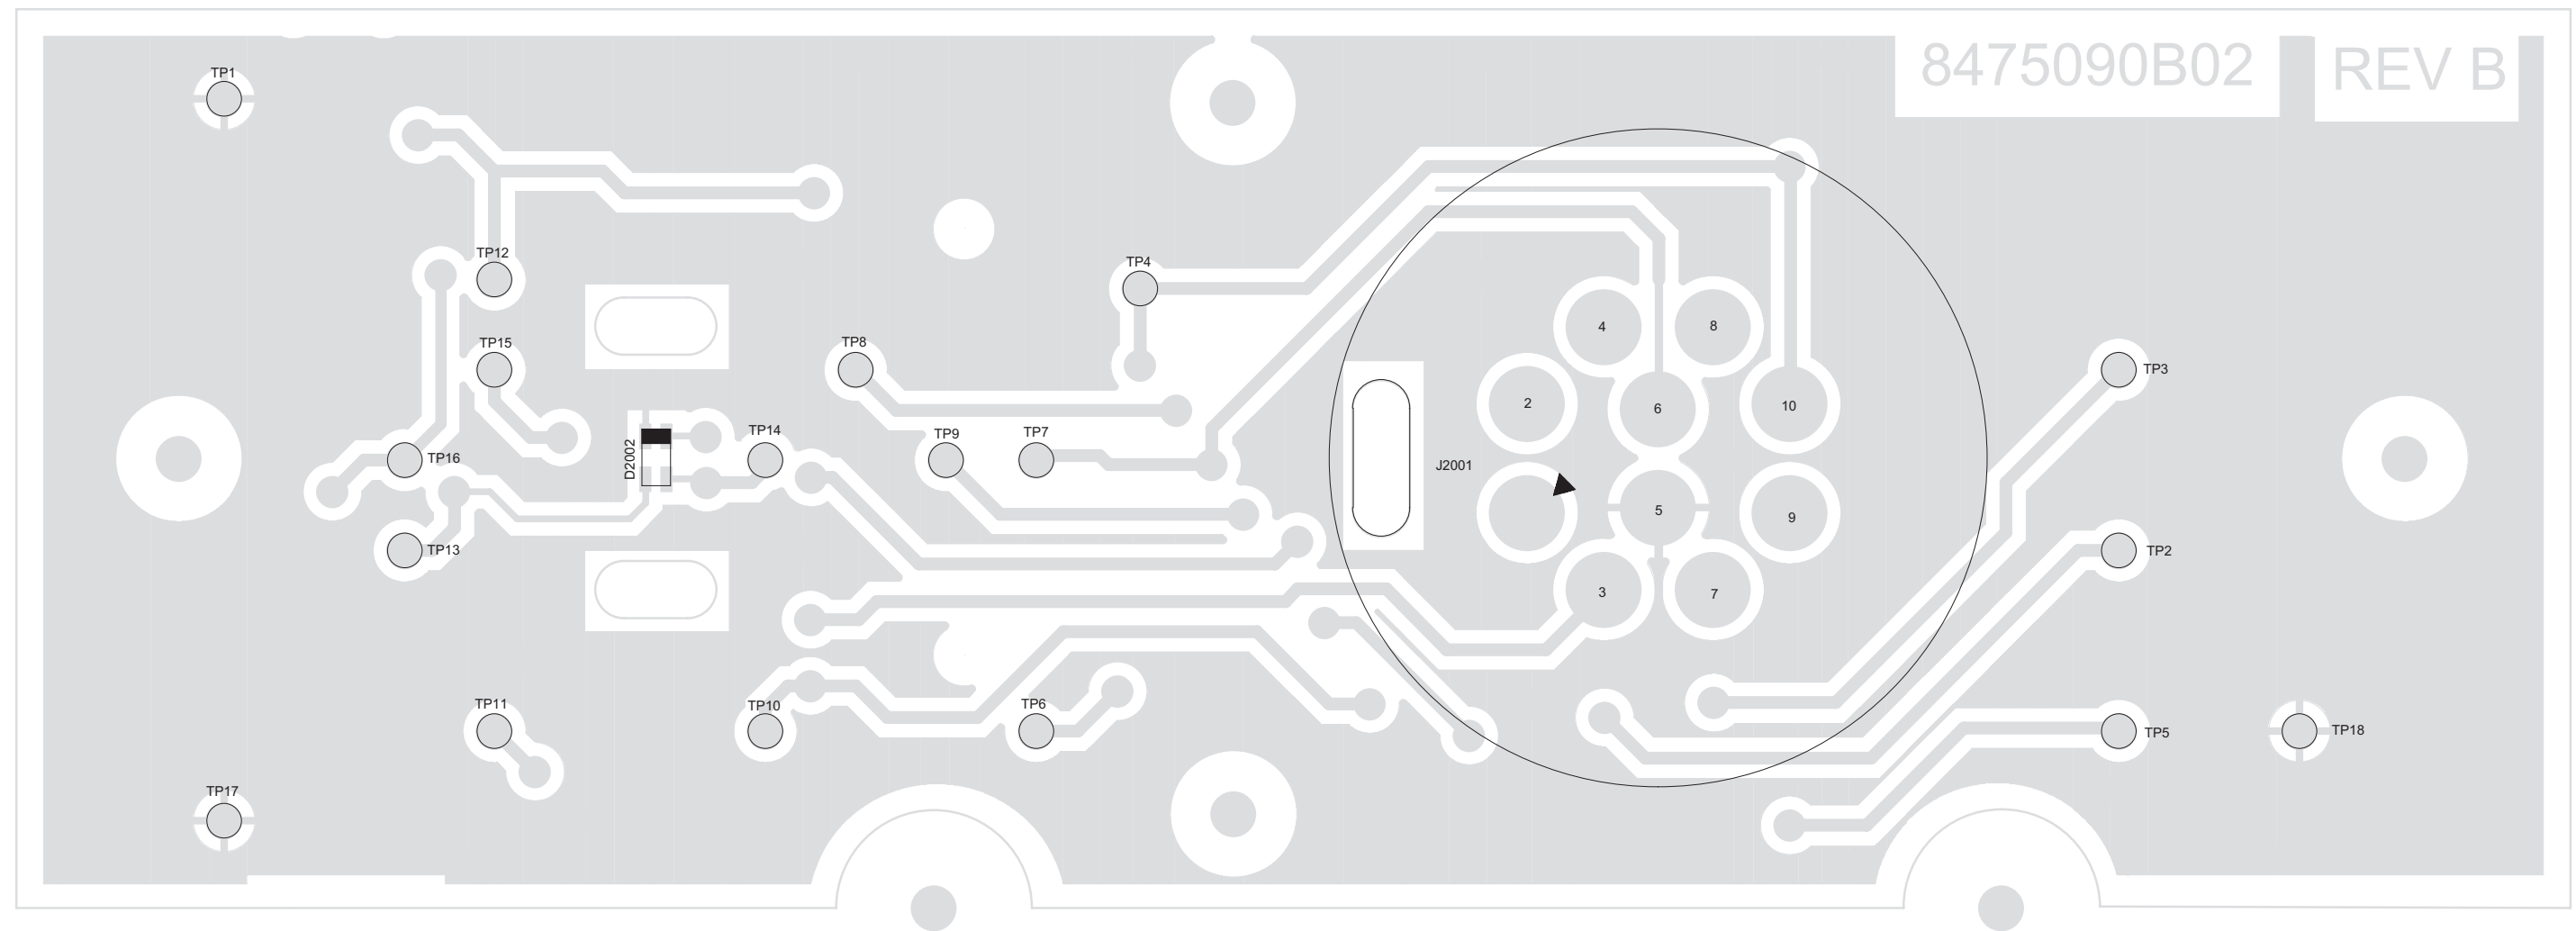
PPLN1694A GCAI Circuit Board Layout - Side 2
